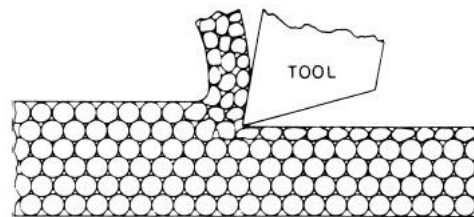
Deformation in the chip and workpiece resulting from machining (Kazanas & Lerwick, 2002)
